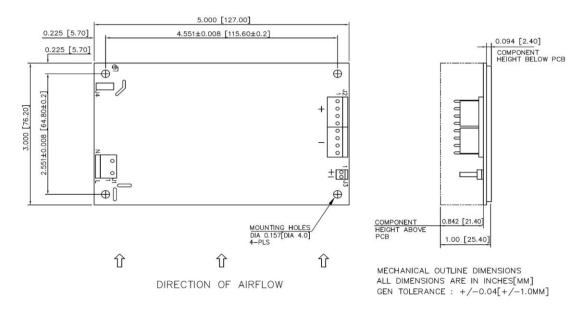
Mechanical Drawing - Molex Header (Option 2)
